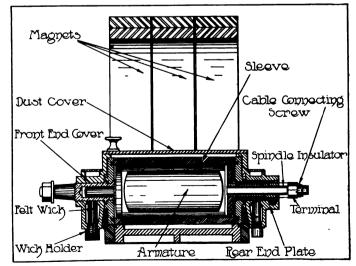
Sectional View of Bosch Low-Tension Magneto Utilized with Make and Break Device Shown at Fig. 47 A.
